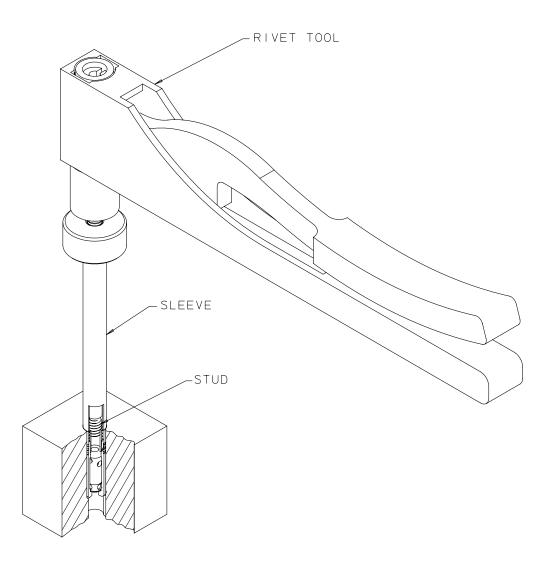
<u>Rivet Type Pin Jacking Tool</u>
